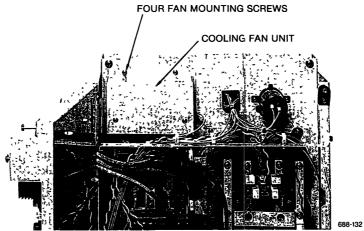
Cooling Fan Assembly of Model CIMR-H22D, 400V, 30kVA
